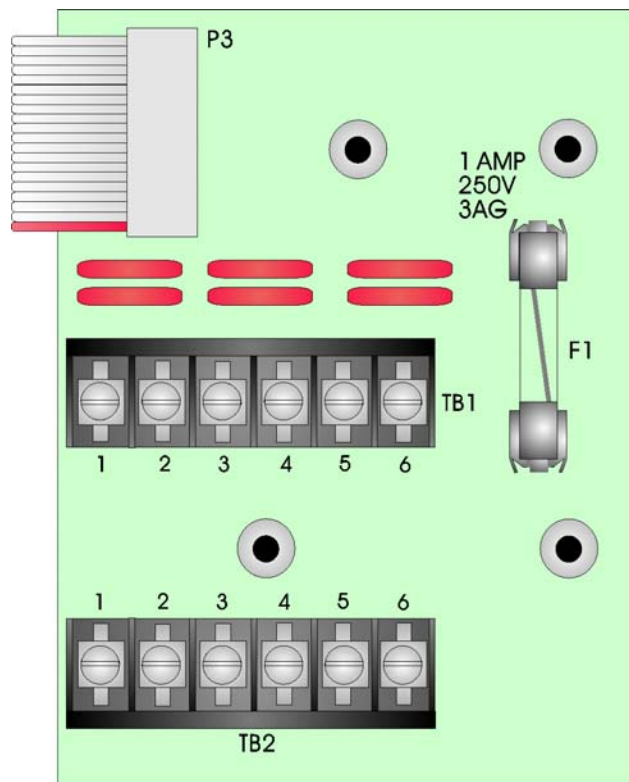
C-22 - Assembly, Raise/Lower Termination Board
